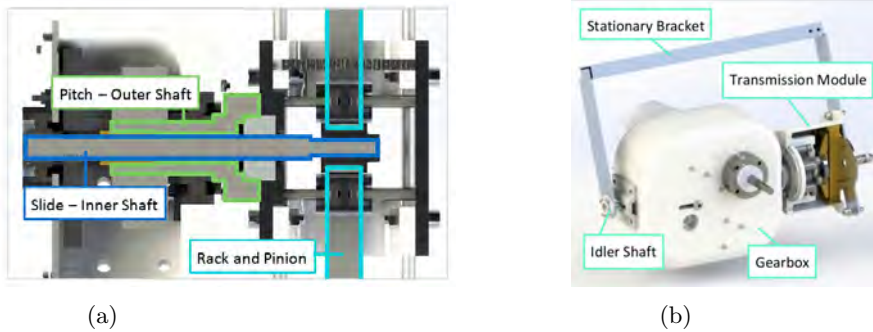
(a) The inner view of the hip gearbox, it shows the transmission of vertical hip slide and hip pitch. (b) A side view of the gear motorbox and the hip roll transmission.
